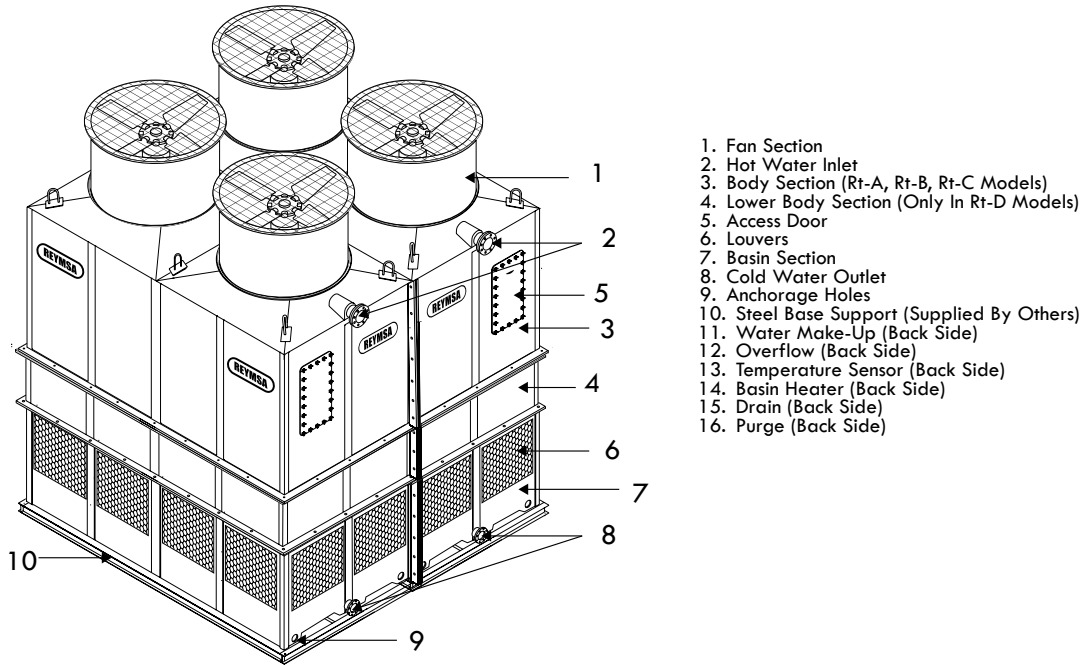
Pipe connections for a Four Fan Tower (RT-D)
